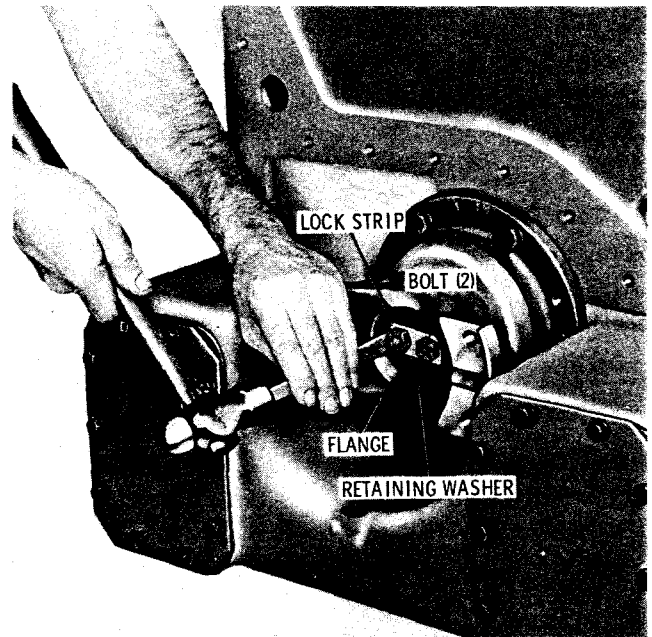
Flattening lock strip which retains front output flange bolts
